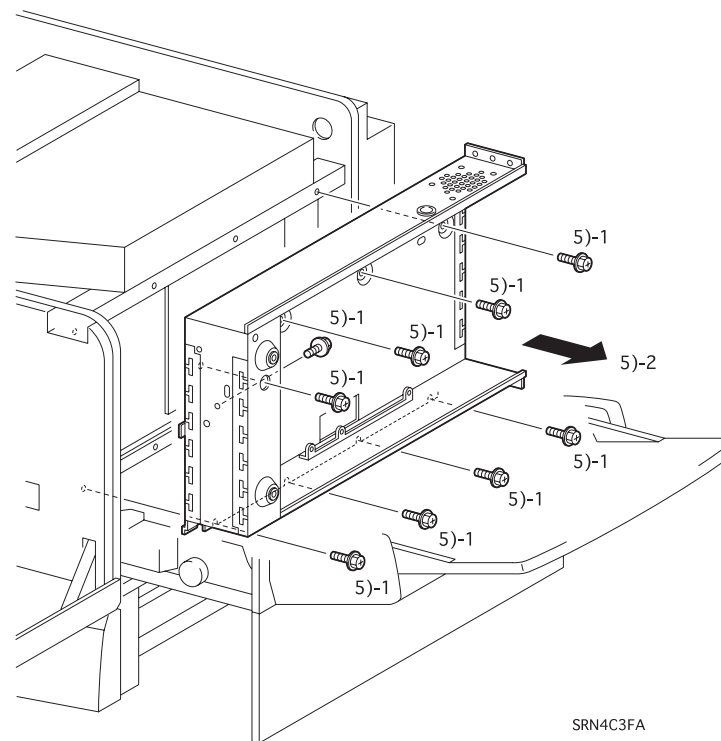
CONT. CHASSIS ASSEMBLY Removal
